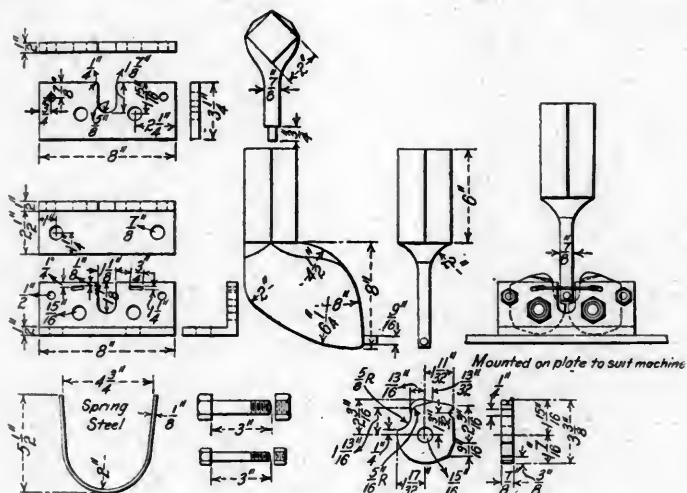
Dies for Bending Cellar Bolts In a Power Punch
